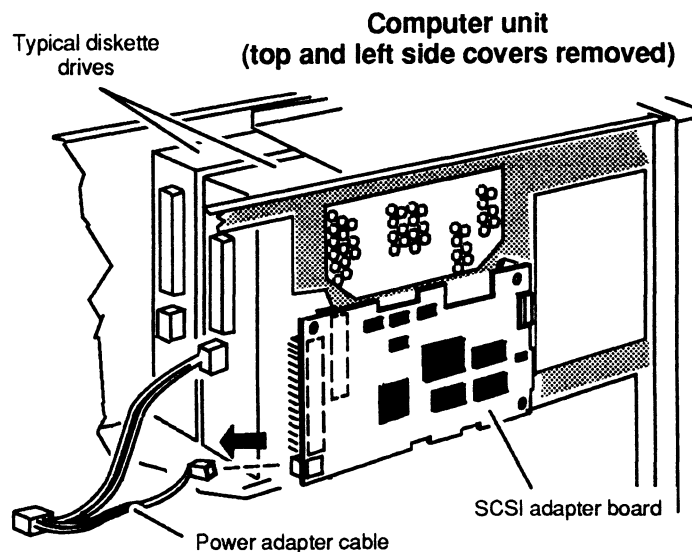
Unplugging the Power Adapter Cable from the SCSI Adapter Board
